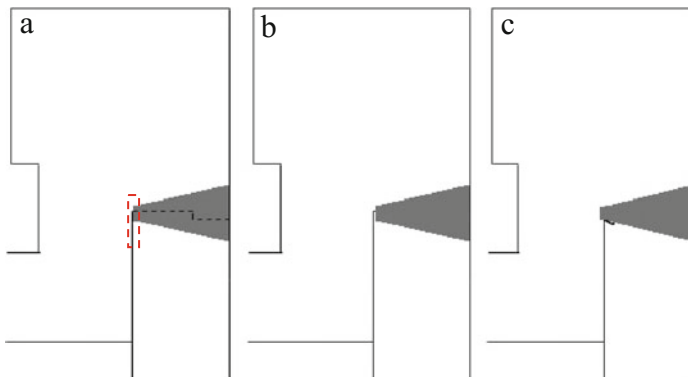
a Ideal weld where the probe tip just reaches the *vertical* joint line. b Shallow weld that leaves a remain of the (*horizontal*) joint line. c Deep weld that leads to hook defect
